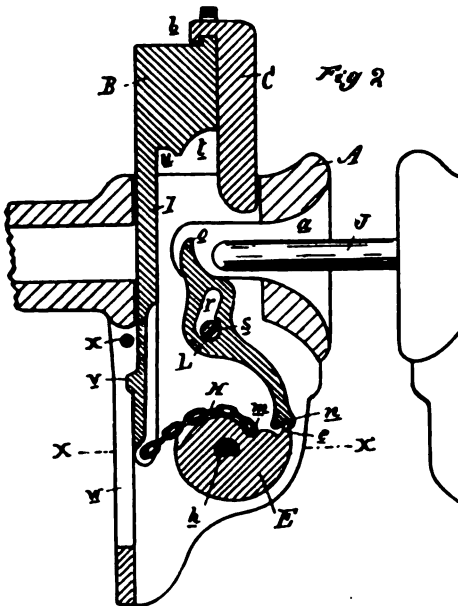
is a perspective view of the coupler as applied to a car. Fig. 2 is a sectional view showing the working parts in detail; B is the pin-carrier, attached at its lower end to the chain H the other end of which is attached to the cam wheel E. The handles (G, g, k in Fig. 1.) are attached by a universal joint to the rod h passing through the cam wheel E and slot, turns this cam wheel, drawing the chain H and raising the pin-carrier B to the position shown in the sectional view Fig. 2. The pin C is attached to the carrier by a lug at its upper end passing through a hole in top of pin-carrier; this hole is made with a slot (shown at d in Fig. 5.) and a shoulder on the lower side of lug on the pin prevents it being removed from the carrier; the carrier is prevented from being lifted high enough to raise the pin free from the draw bar by the projection v and the bolt x; when it is desired to remove the pin or replace it with a new one, the bolt x is withdrawn, the carrier raised to its full height which draws the pin entirely free from the draft iron; it is then turned
